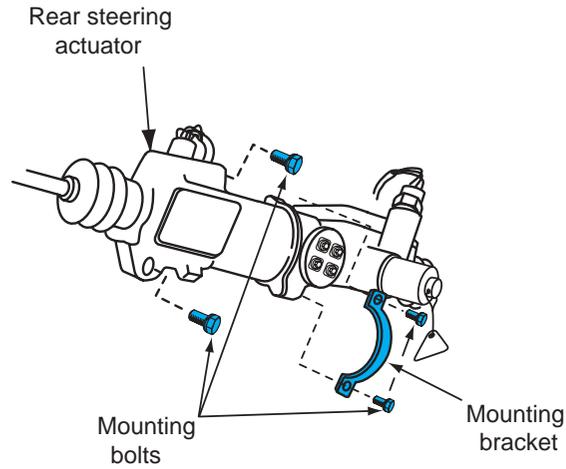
Removing the four mounting bolts, bracket, and rear steering actuator.
